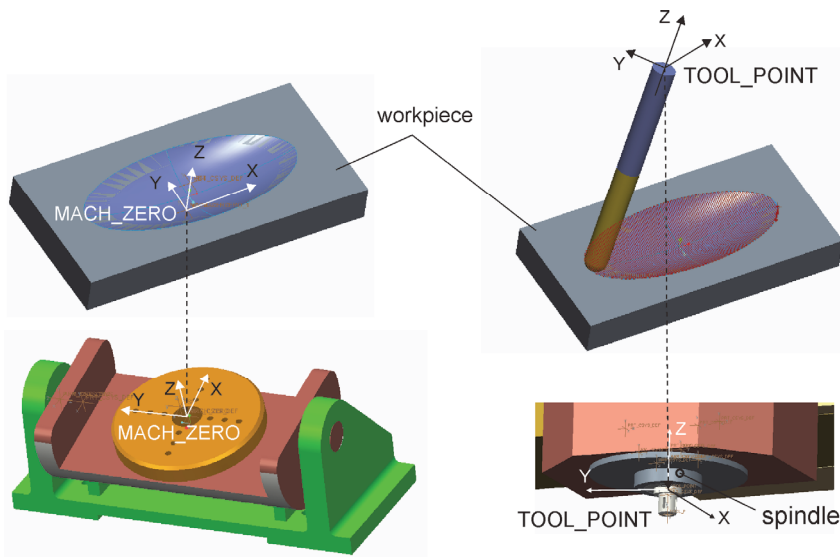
Coordinate system of the workpiece and tool with tool path simulation
